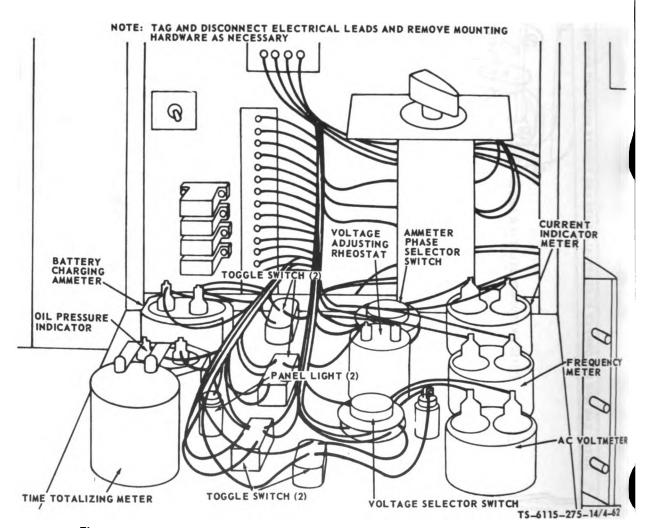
Controls and instruments, removal and installation (Model MEP-023A).
